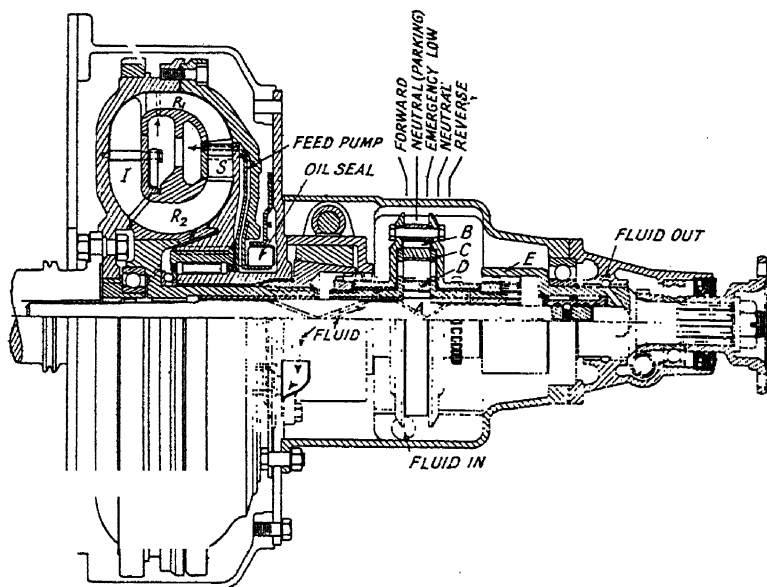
The Bendix Turbo-Flywheel Transmission System.
